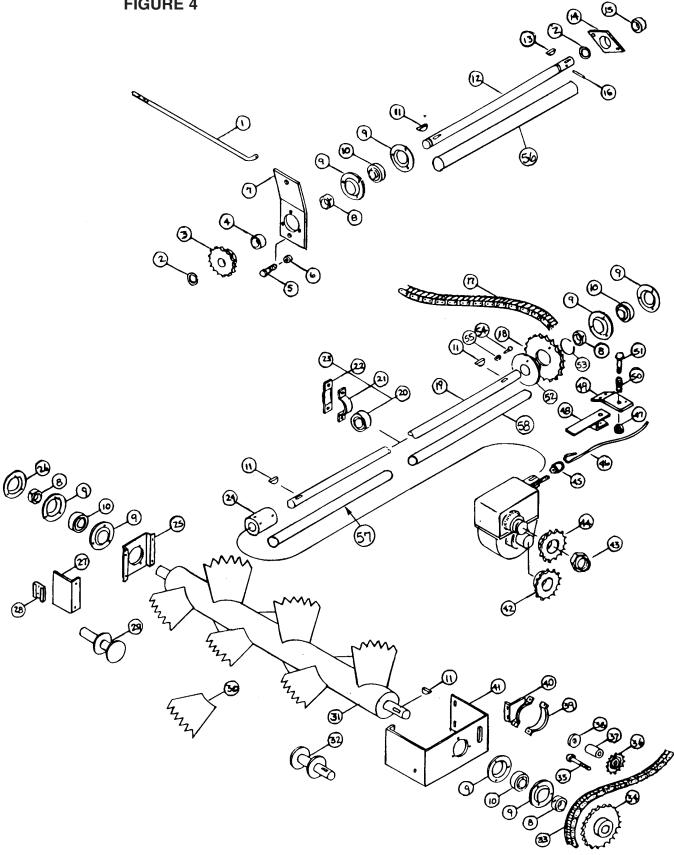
MODEL 125 FRONT SHAFT, SIDE SHAFT AND BEATER
